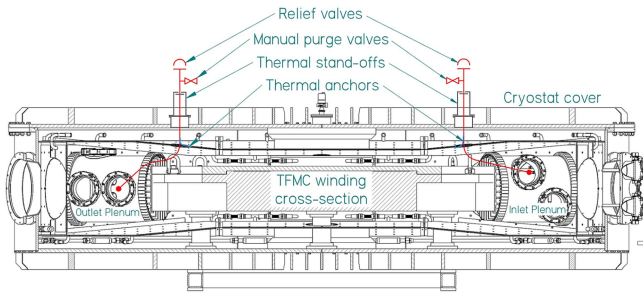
Relief line routing overlaid on cryostat section drawing.
